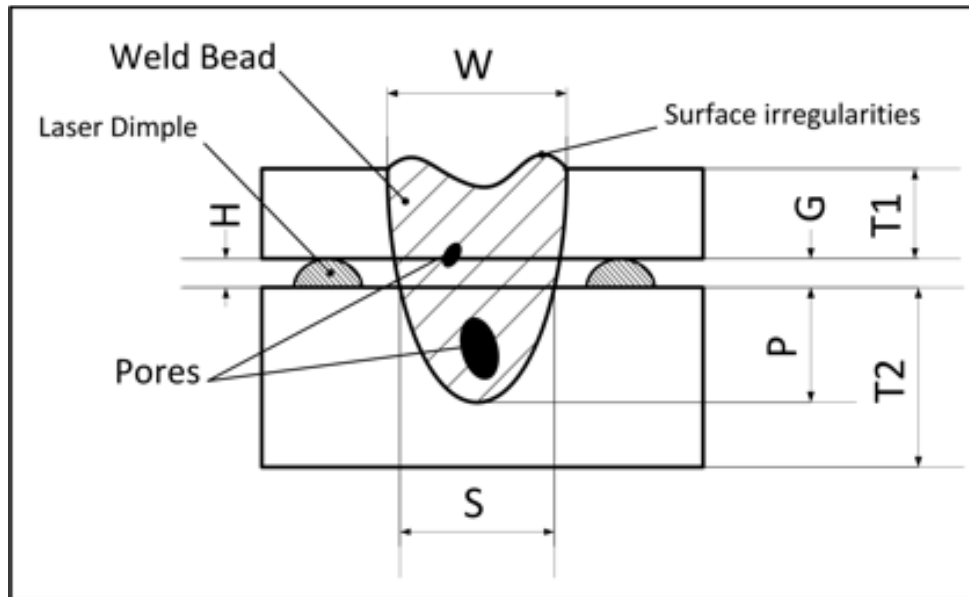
Configuration of the laser dimpling and remote welding processes.
